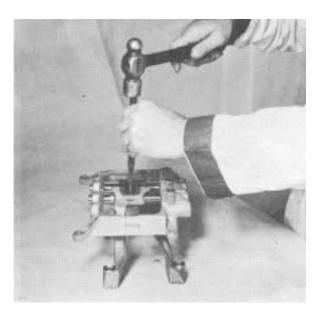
Using a small pin or drift, remove 2nd & 3rd shift fork roll pin.
